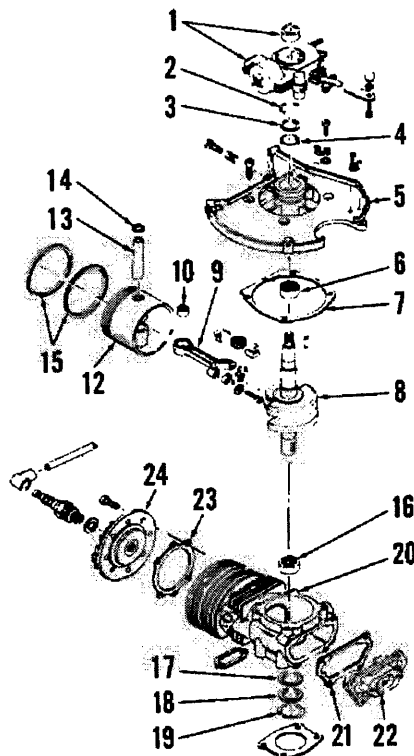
Exploded view typical of Tecumseh AV520 and AV600 models. Early models were equipped with plain bearings at connecting rod large end.
